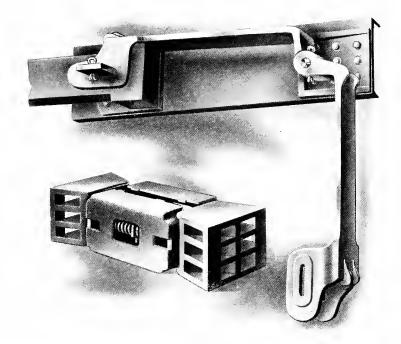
Murray Keyoke with Lower Casting Dropped for Application of New Draft Gear. Keyoke Railway Equipment Company.
